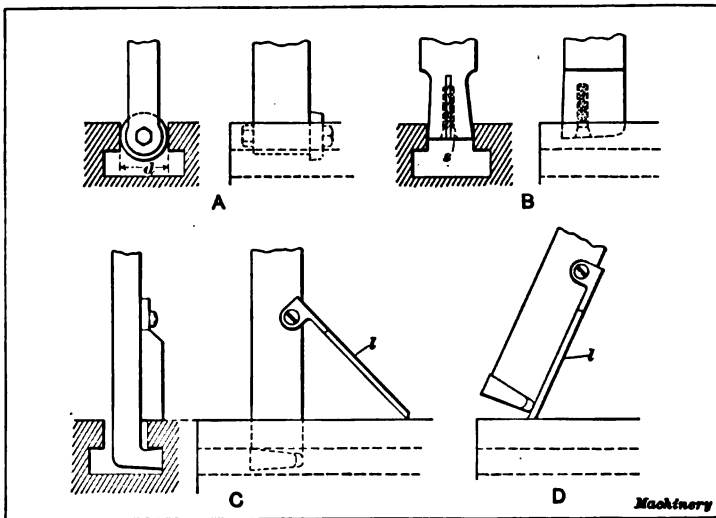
(A) Sizing T-slot with Circular Tool. (B) Adjustable Tool. (C) Undercutting Tool with Lifting Latch
